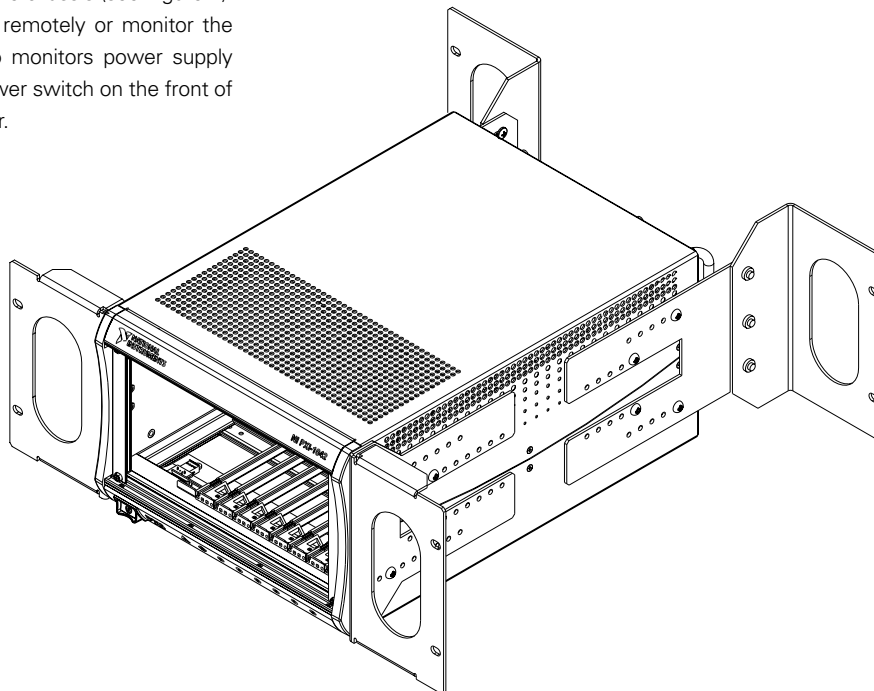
The NI PXI-1042 Chassis with the Optional Front and Rear Rack Mount Kits
